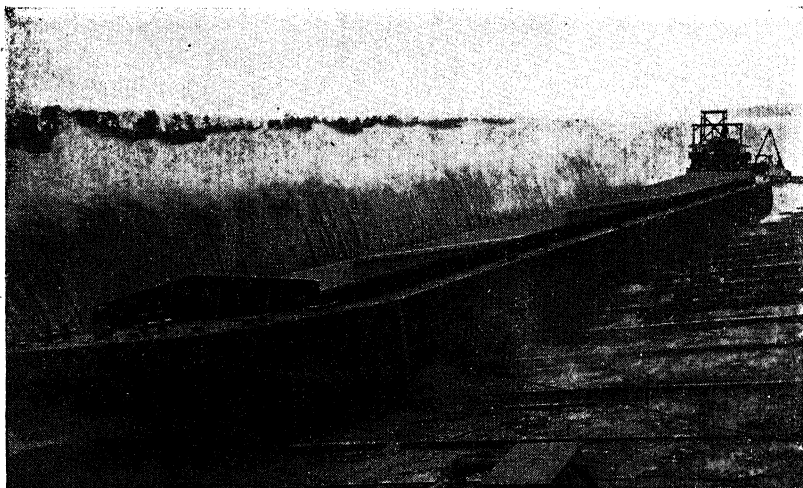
All welded river barge being launched. 280 ft. long, 48 ft. wide, 11 ft. deep. Contains 600 tons of steel. At this time, this barge was one of 566 all welded hulls built by this company. Tractor type automatic shielded carbon arc welder used out of doors for many of the horizontal lap and butt welds.
